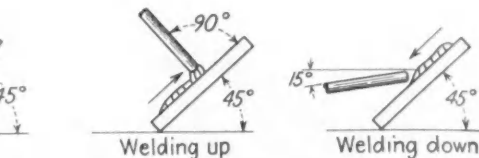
When welding on an inclined surface special care must be taken to produce a uniform bead that does not have excessive roll or overlap.
